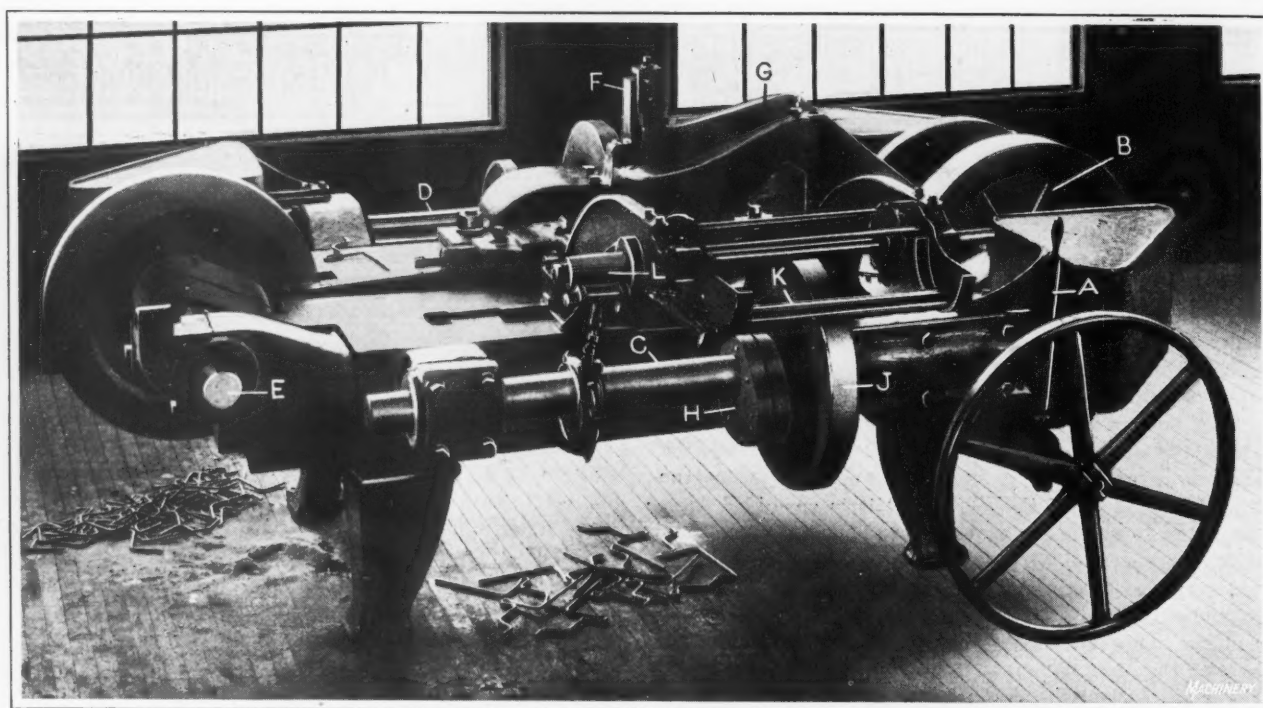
Ten-ton Four-slide Wire-forming Machine designed for bending Stock up to 9/16 Inch in Diameter
